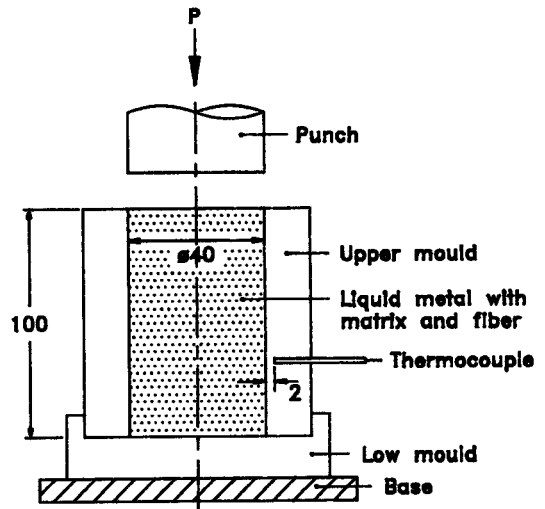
Billet fabrication mould to investigate dispersion of short fiber
